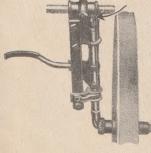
Pivot axle with ball bearing. See also lubricating cup and sand cap
